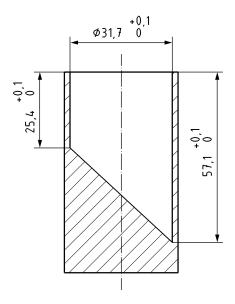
Small parts cylinder iTeh STANDARD PREVIEW
